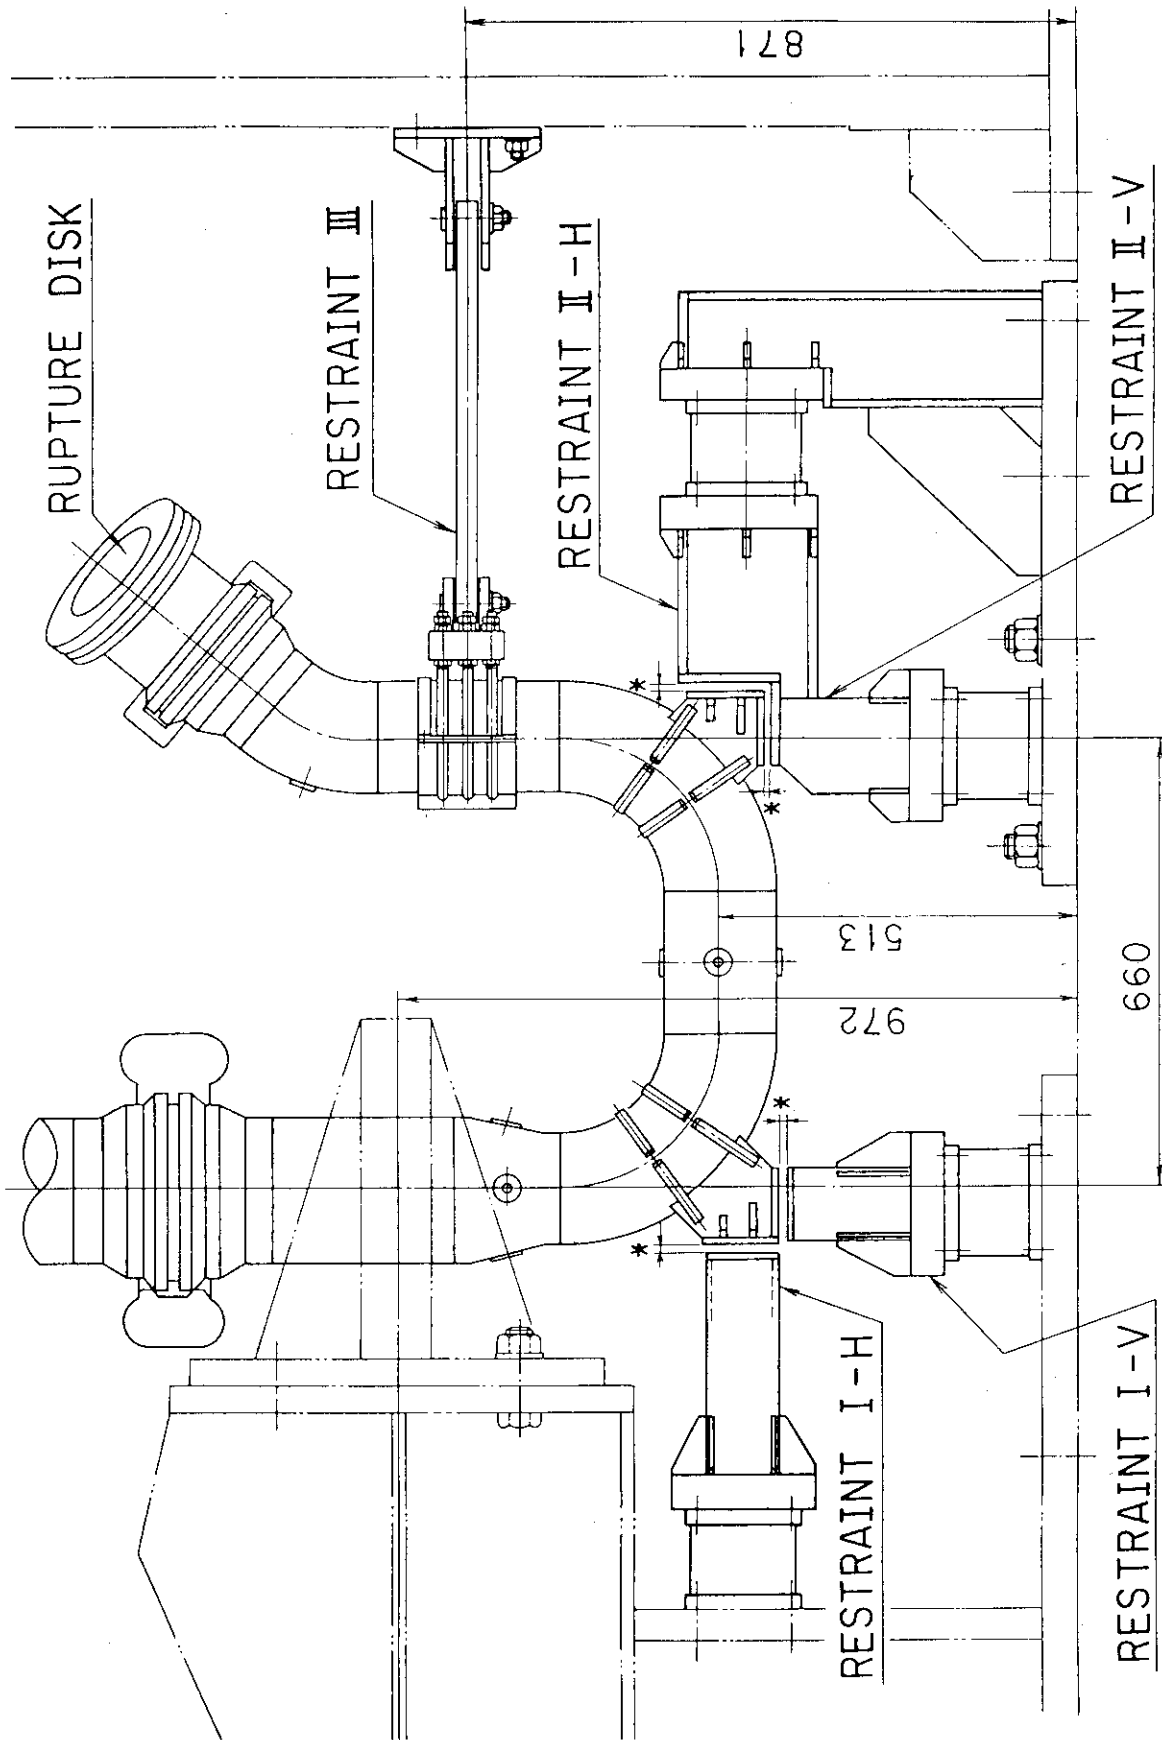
Detail assemblage of the test pipe and the restraints
